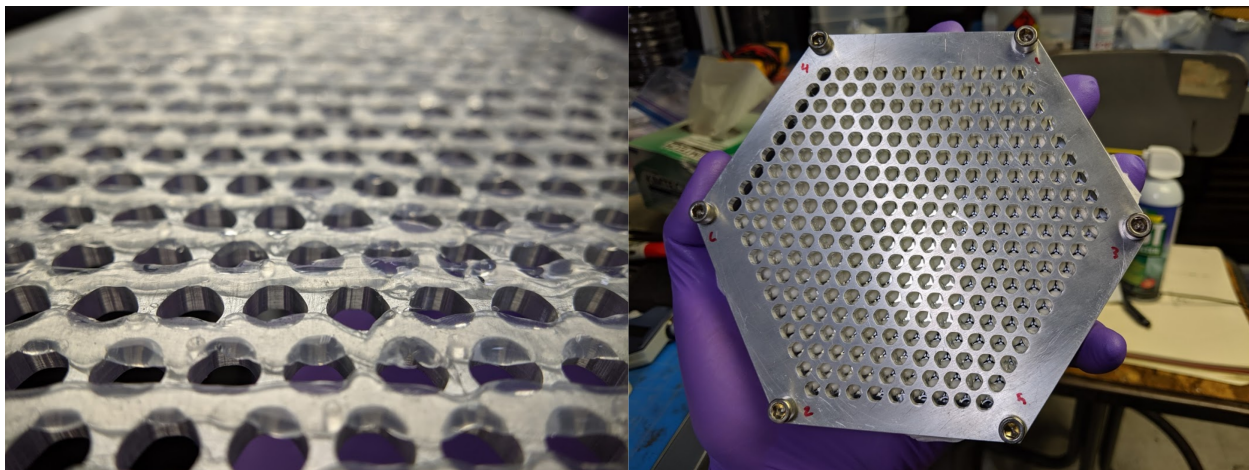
Picture of the lenslet-side of the seating wafer press (left) and the assembled seating wafer press jig (right).
